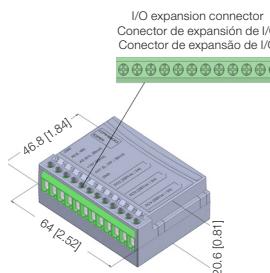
CFW300-IOAR dimensions in mm [in] and connectors location
